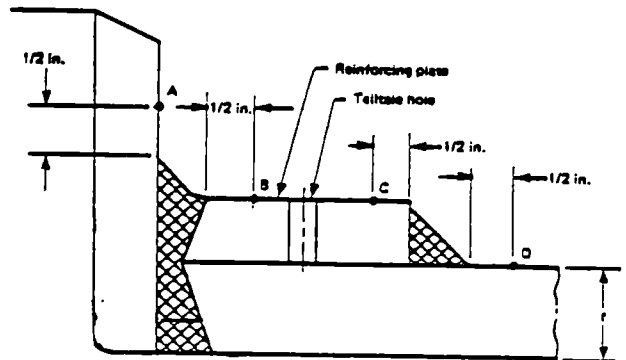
Requirements for Class 2 nozzle-to-vessel welds
